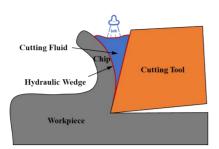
Hydraulic wedge between cutting tool and workpiece.
